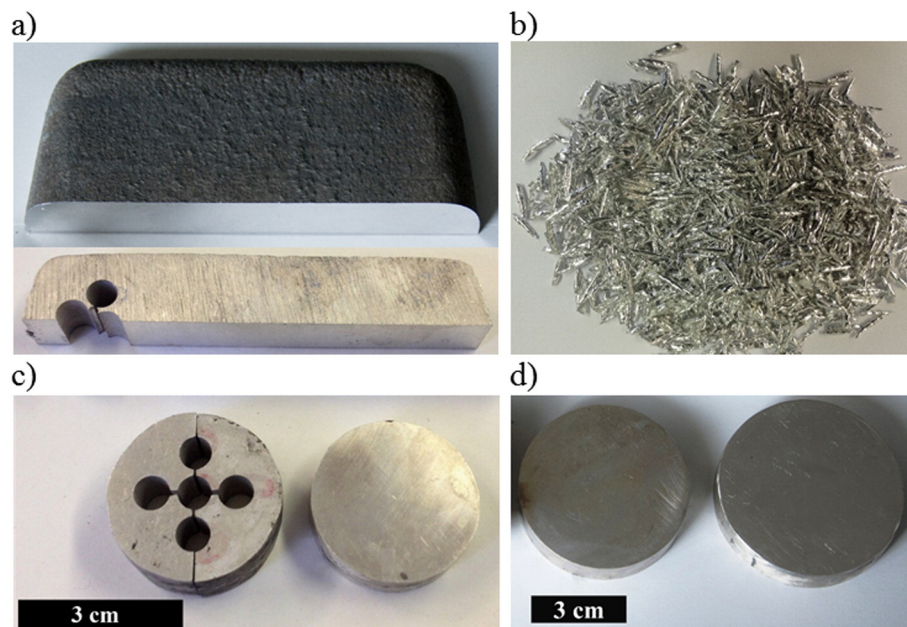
(a) AZ31 (Mg-3Al-1Zn) (upper) and pure Mg (lower) starting ingots; (b) Chips produced by face milling; (c) recycled SPS Mg blank; and (d) recycled AZ31 SPS blanks.
